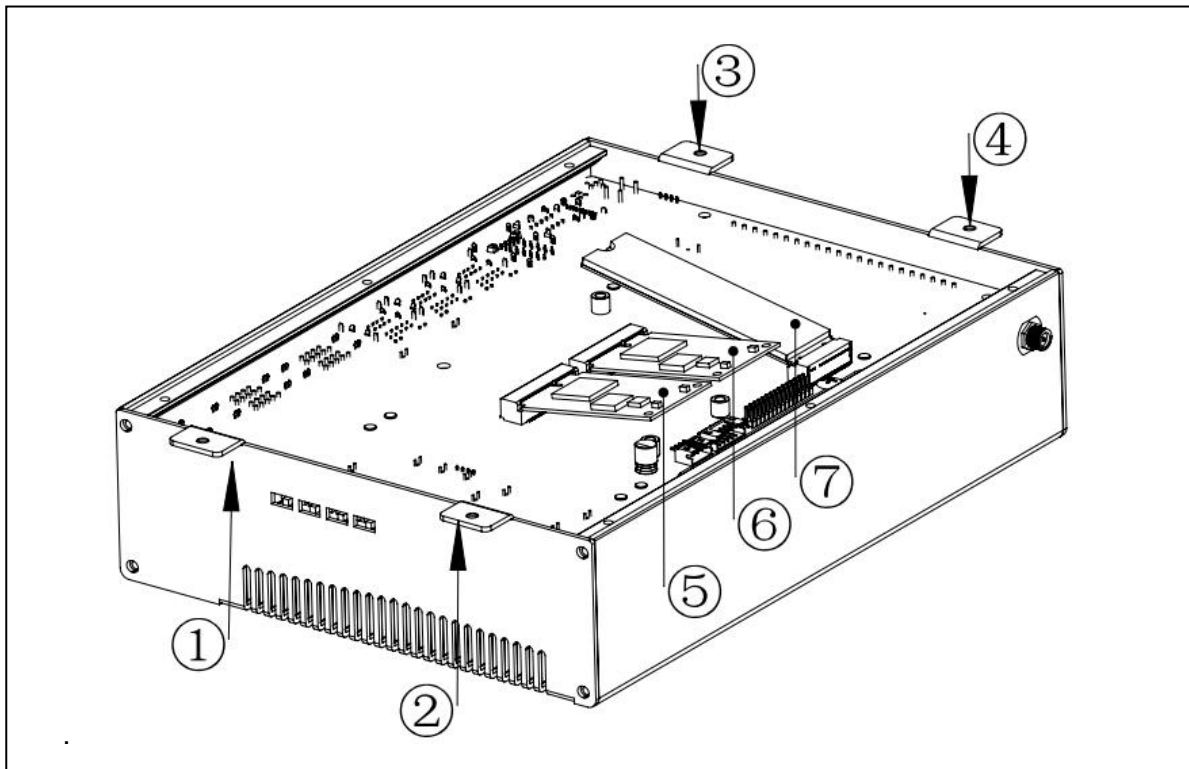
1 TPC6000-XXX4 miniPCIE expansion card installation
